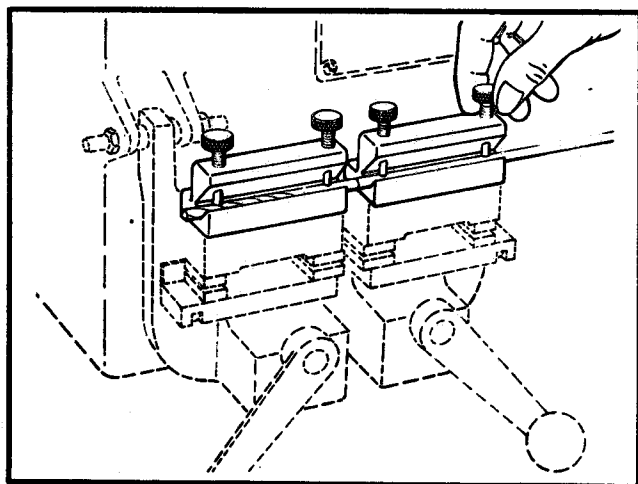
USING ROD WELDING JAWS TO WELD EXTENSION ON DRILL.
